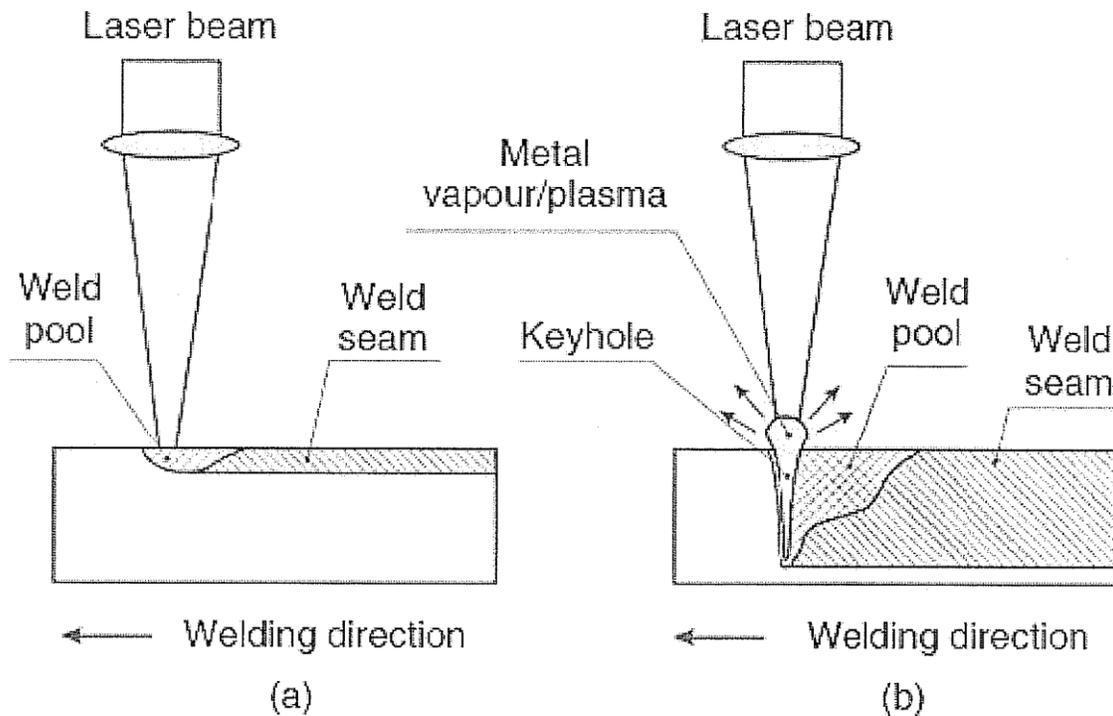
Schematic diagrams of (a) conduction mode laser welding and (b) keyhole mode laser welding [21]
